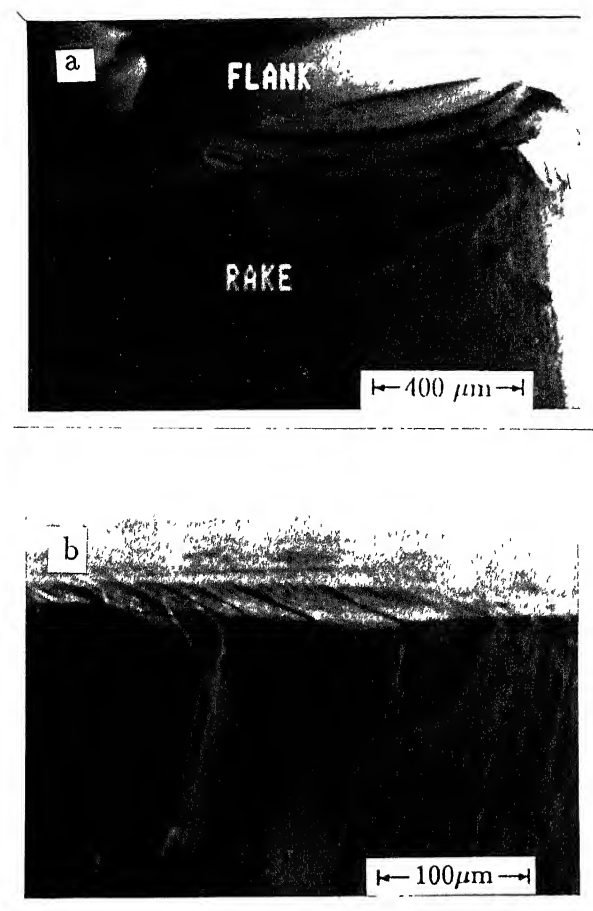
SEM pictures of tool made of alloy B, showing (a) cutting edge breaking, and (b) development of cracks on both rake and flank faces perpendicular to cutting edge when cutting EN 9 steel at 180m/min.
